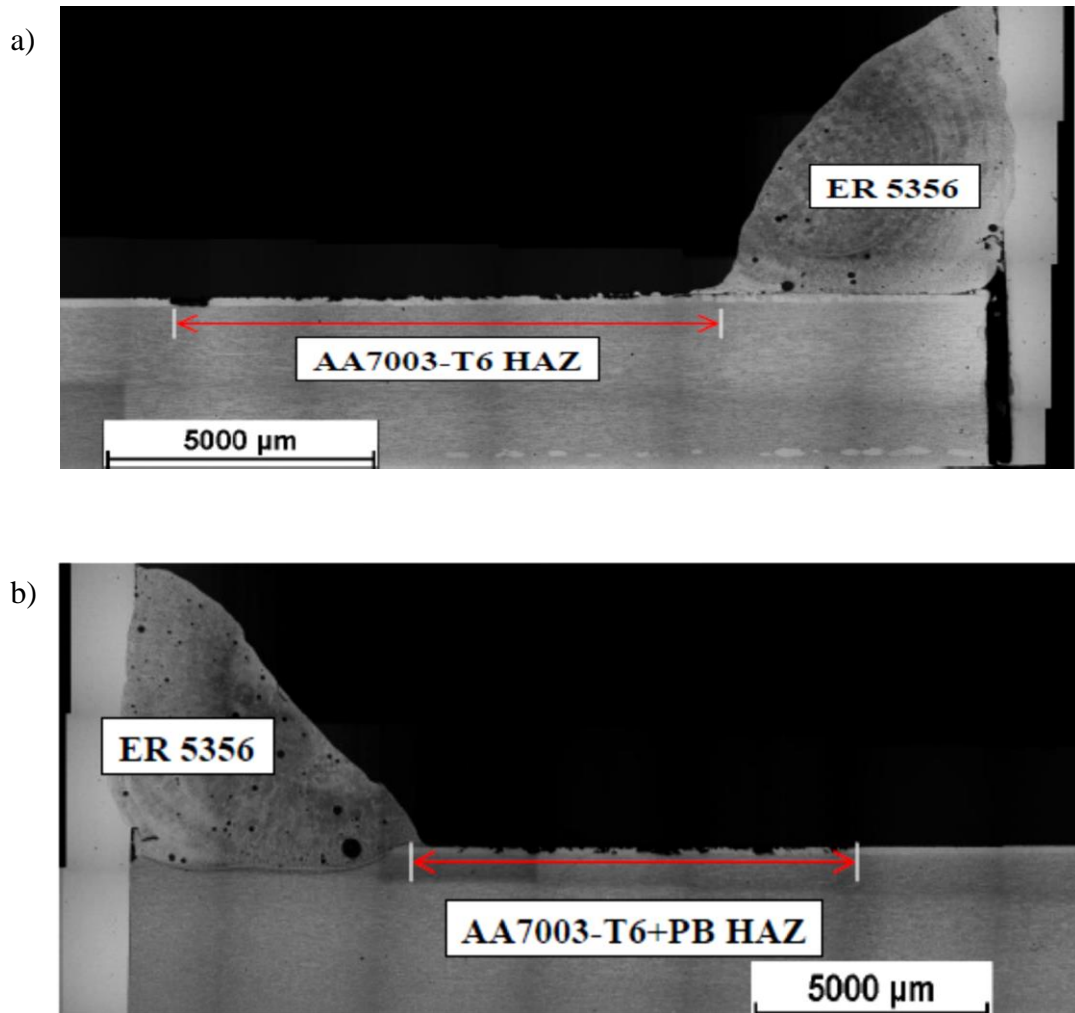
Large area scans of T-joint welded configuration H (ER5356/AA7003/≡) in the (a) as-welded T6 condition and the (b) as-welded T6+PB condition post exposure to ASTM G85-A2.
